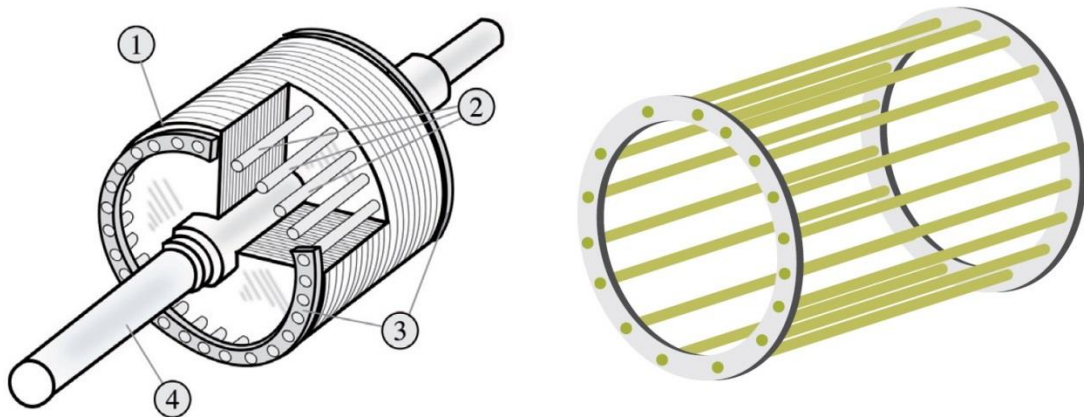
Detailed squirrel cage rotor construction and winding.
